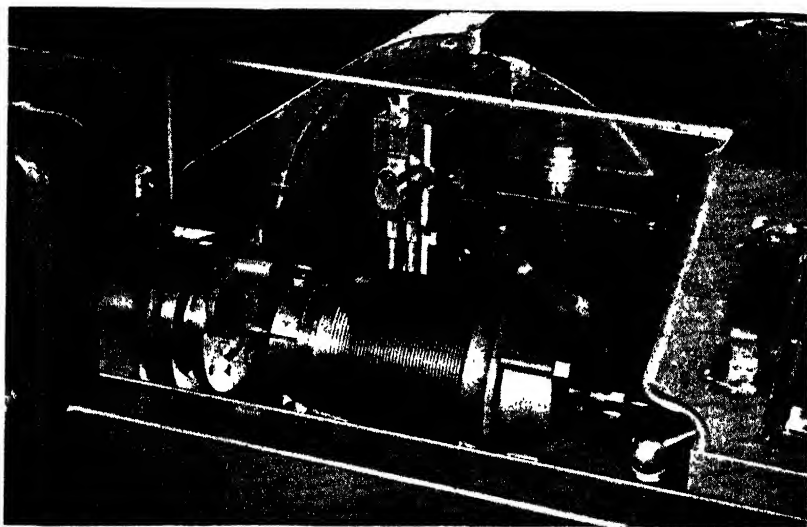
Grinding Buttress Thread on Engine Cylinder Barrel
